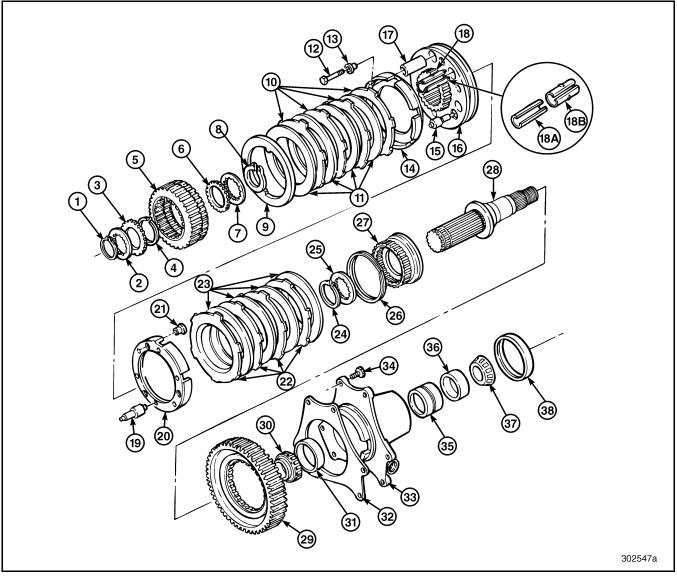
Exploded View of Rear Output Shaft and Synchronizer Assembly, T313–T318(21)(L21)(LR21)
